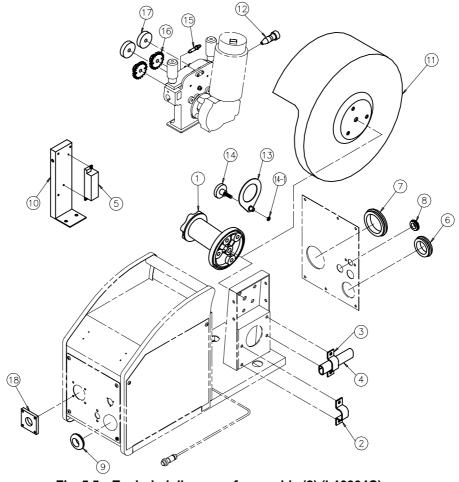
Exploded diagram of assembly (2) (L10904C)
